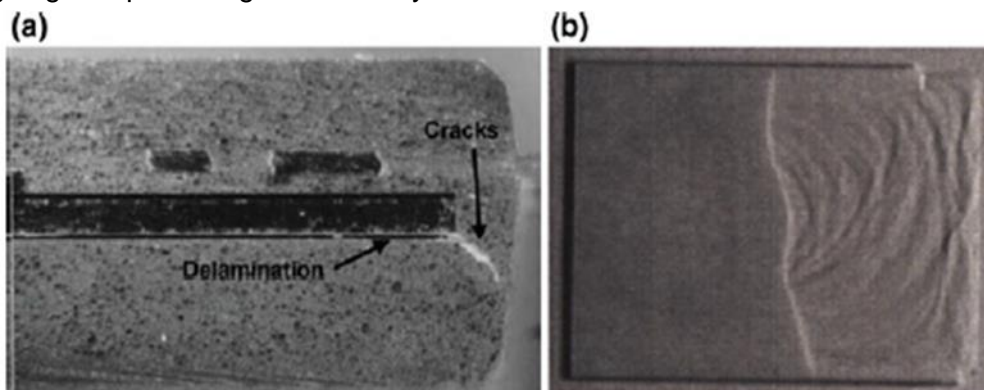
(a) Solder Fatigue, (b) Cracks on Substrate
